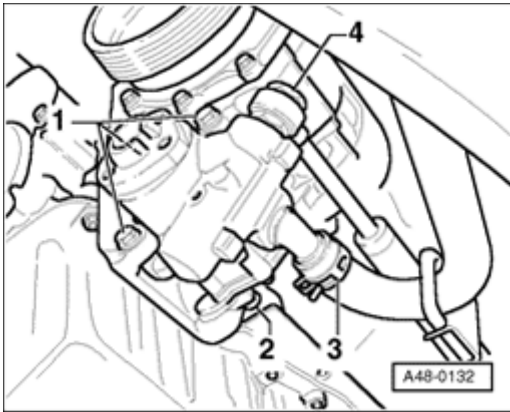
Identifying Spring Clamp, Expansion Hose & Bracket
